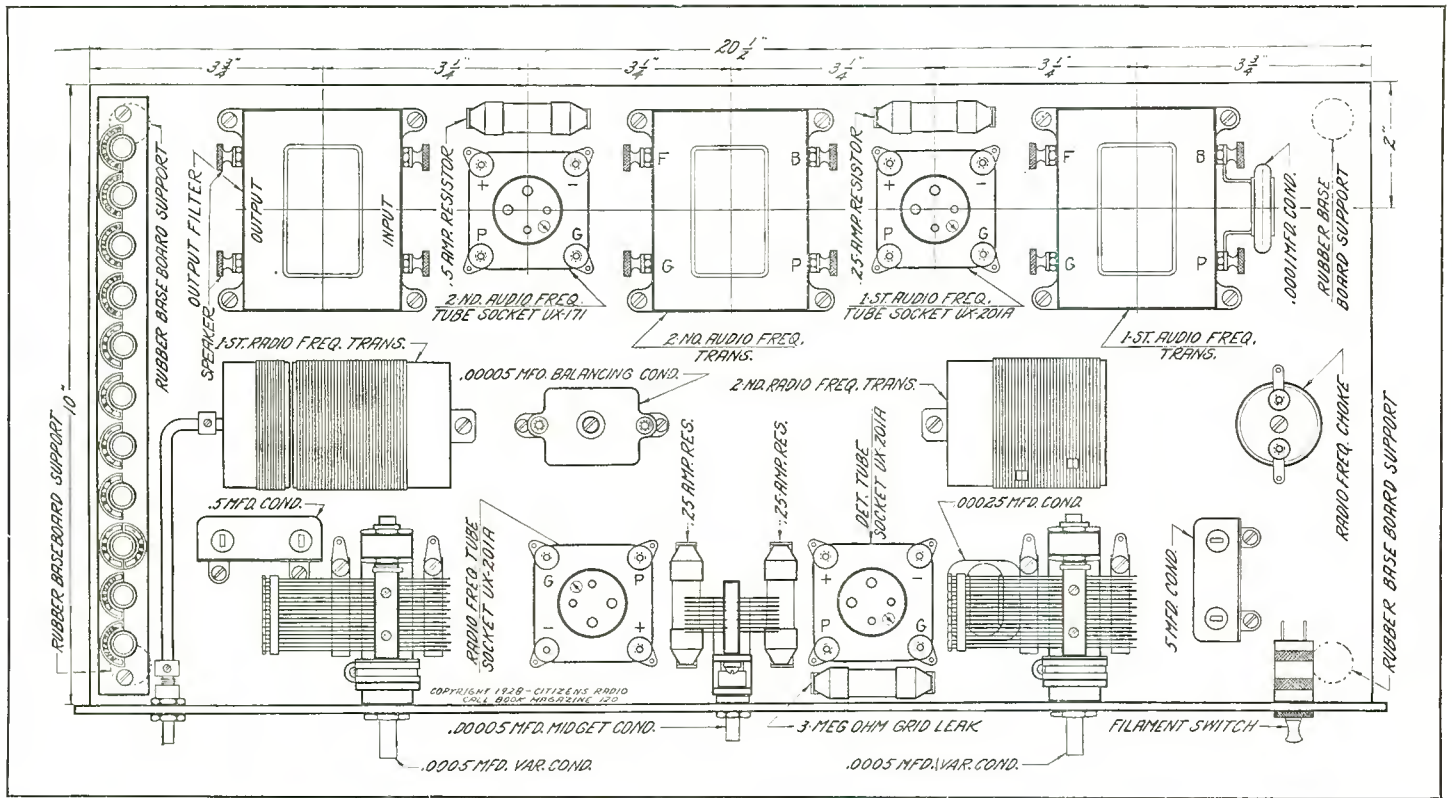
When laying out parts for the four tube receiver described in this article they should be placed in accordance with the baseboard assembly drawing shown above
